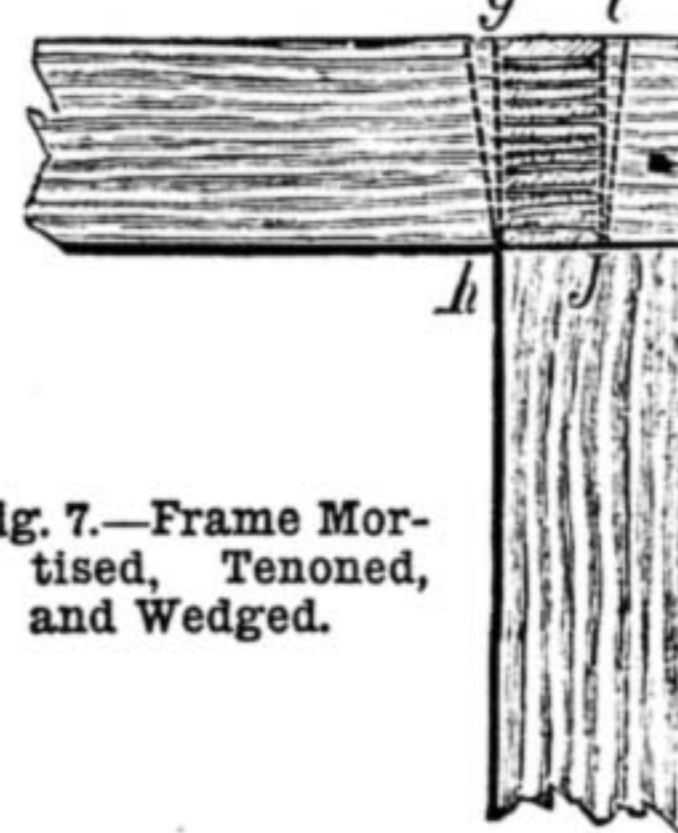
Frame Mortised, Tenoned, and Wedged.
